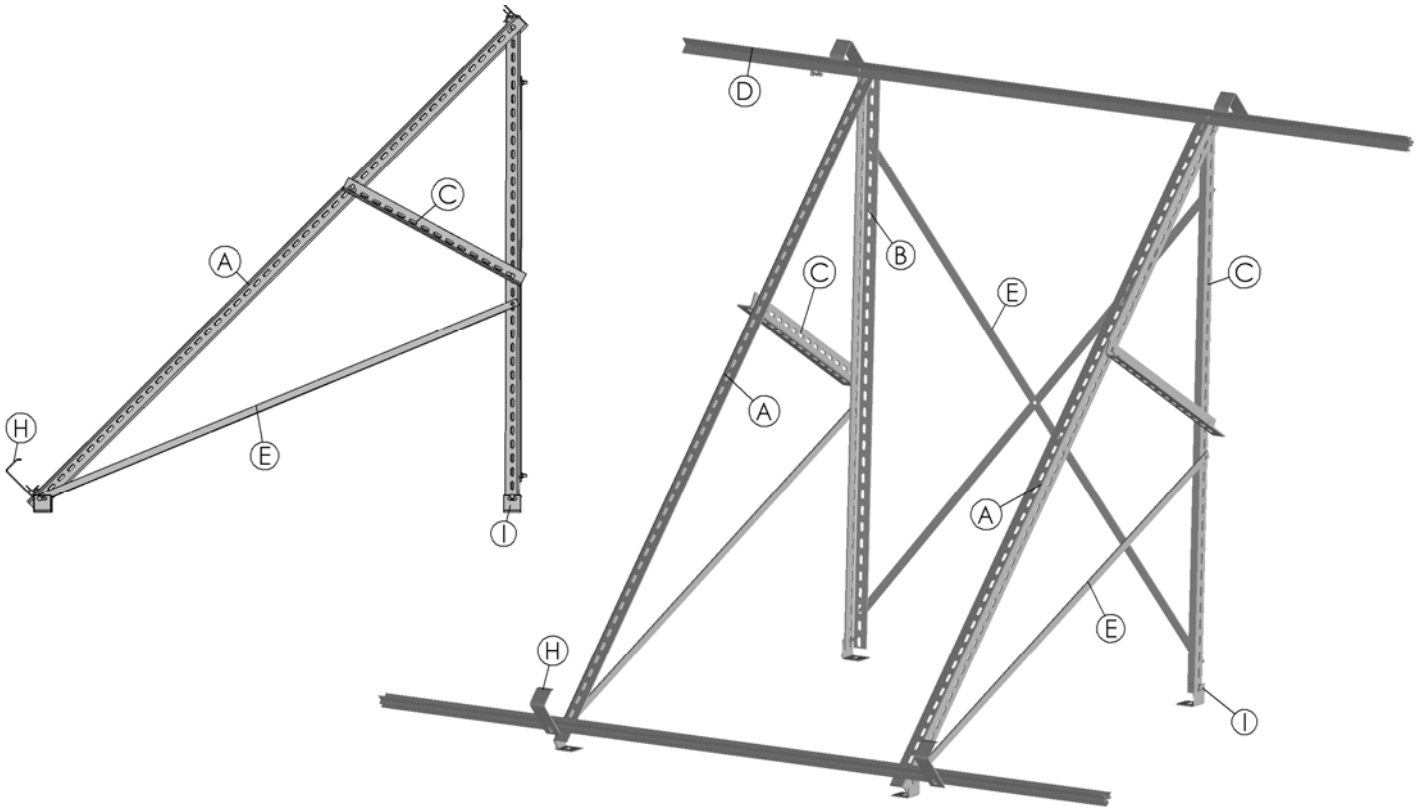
Villaset Flat Roof Structure for 3 Panels
